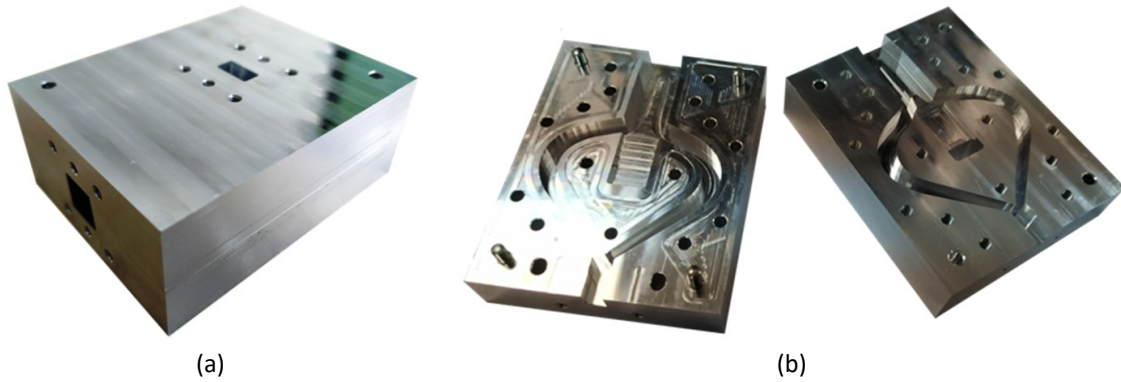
Manufactured OMT: (a) assembly and (b) constituent parts.
